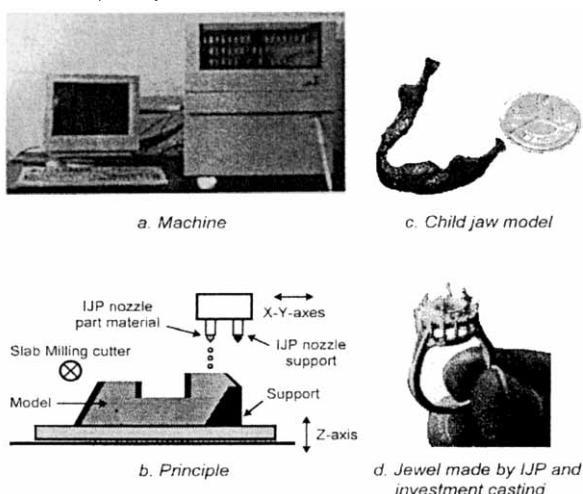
Model Maker II Ink Jet Printing System (Sanders)
